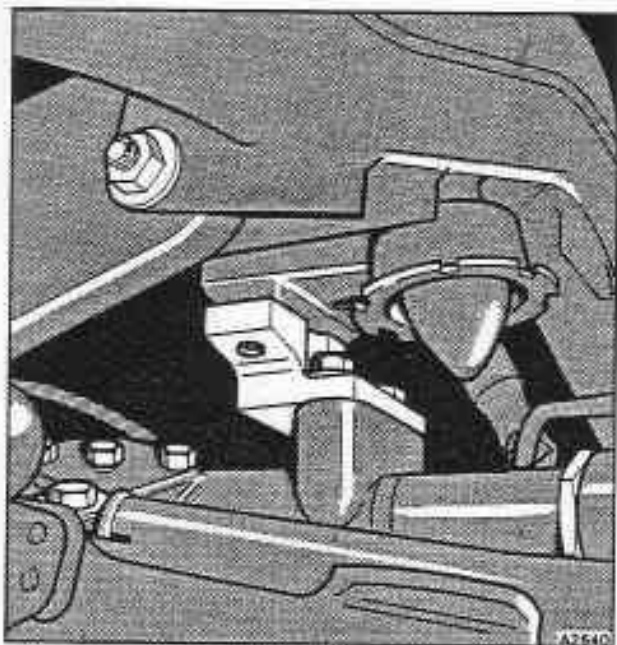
Modified arrangement – adapter blocks to sub-frame
